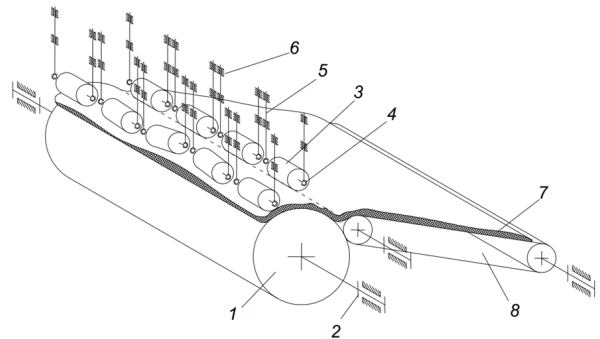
General view of the roller machine (isometric view) 1 - lower working roller, 2 – frame work, 3 - upper working roller, 4 - support of the upper working roller, 5 - rod, 6 - guide support, 7 - fibrous material, 8 – conveyor
